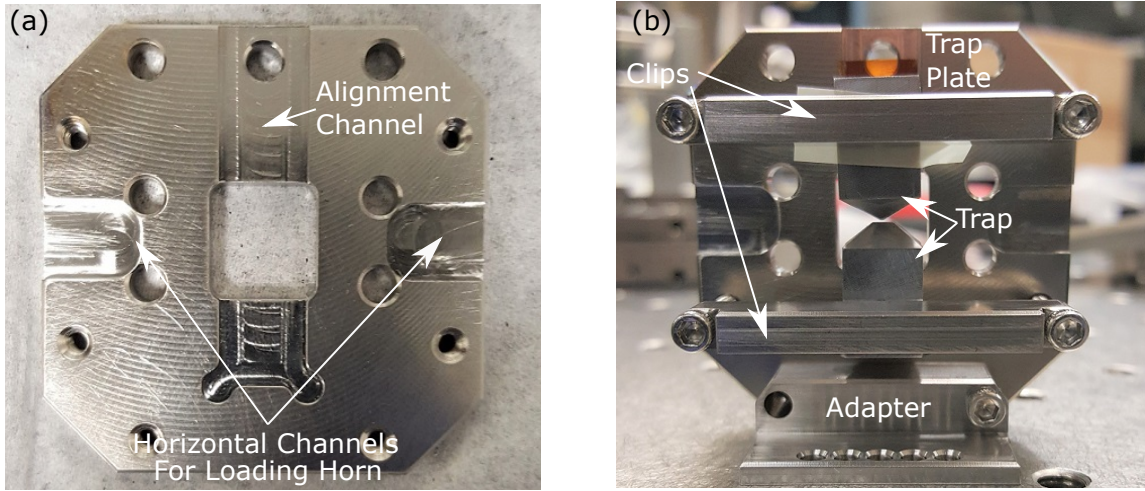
(a) The bare design of the trap plate. (b) A realized assembly of all in-house machined parts, including trap plate, clips, trap, and plate to groove grabbers adapter.
